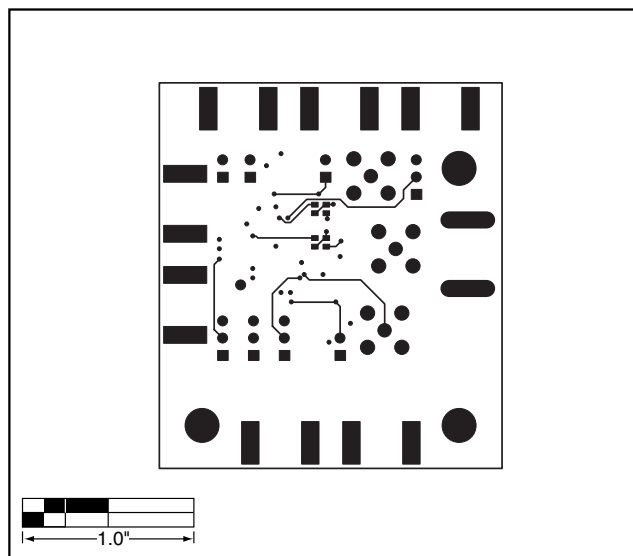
MAX2385/MAX2386 EV Kit PC Board Layout—Solder Side
